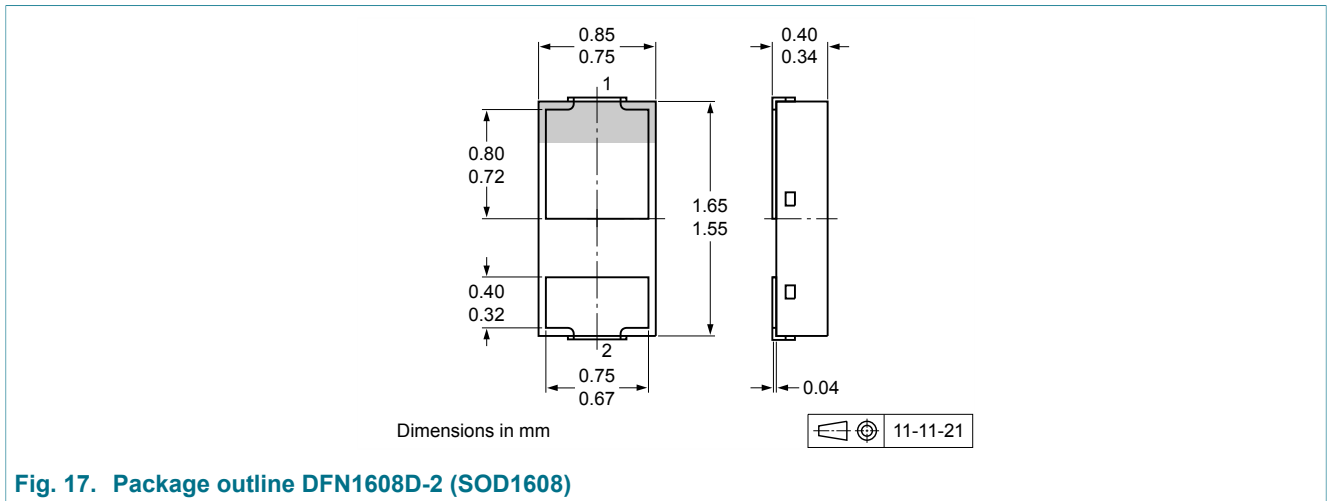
Package outline DFN1608D-2 (SOD1608)
